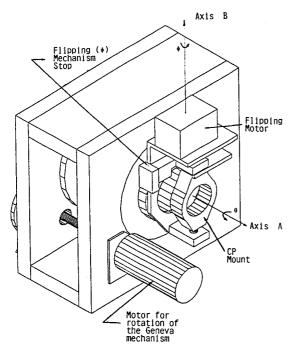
Back view of prototype Stokesmeter displaying the flipping mechanism.
